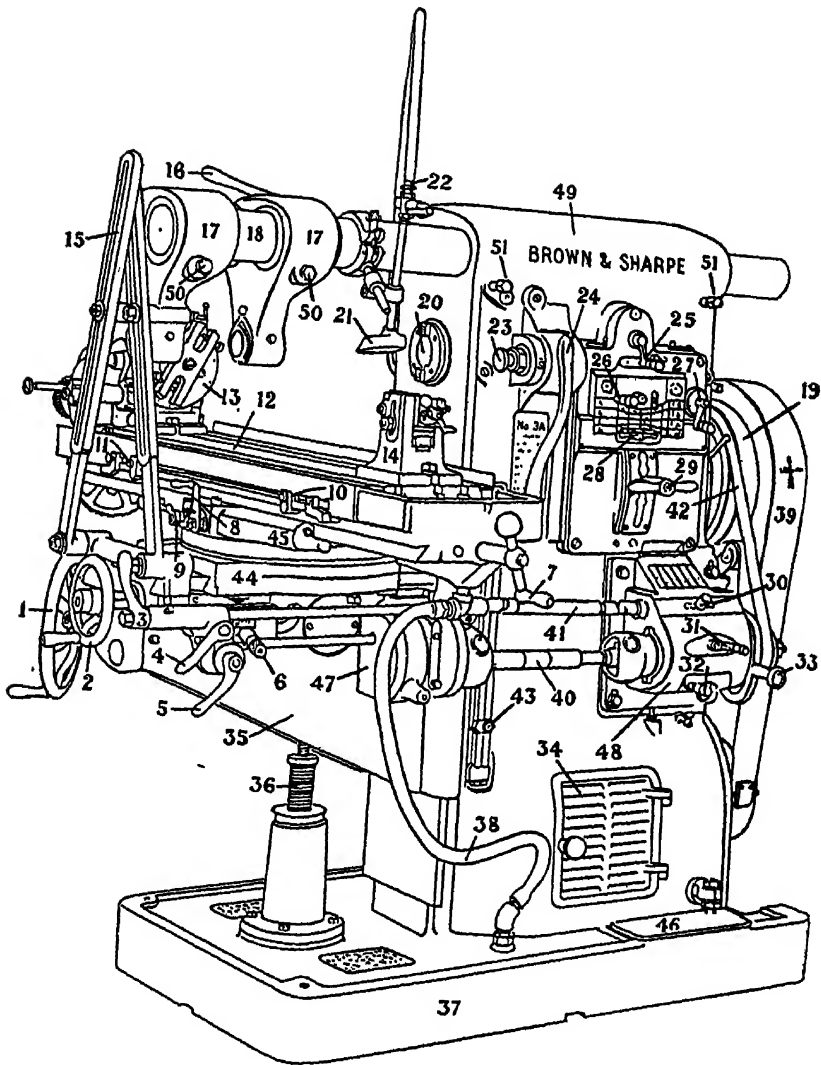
OUTLINE DRAWING OF MILLING MACHINE SHOWN
